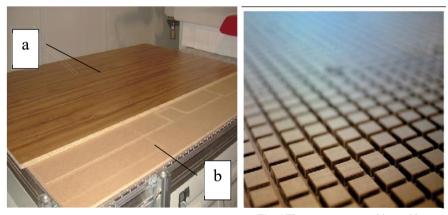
Boards on CNC working table a) for cat, b) basic board
